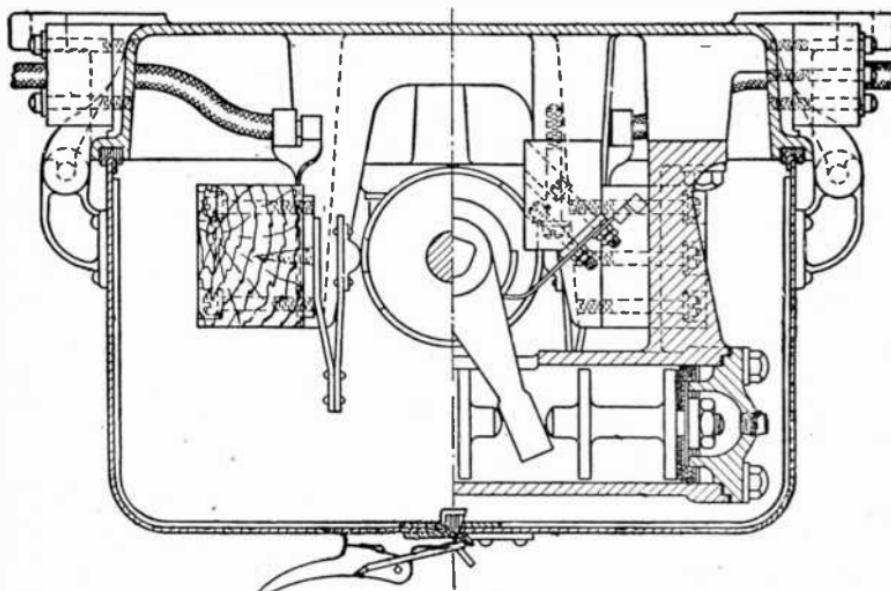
,294.—Westinghouse reverser. *Adjustments:* The portion of the finger which makes contact with the drum should be true so that when pressed against a flat surface it makes contact throughout its entire width. Adjustment of each finger may then be easily made by using a wrench where necessary to bend the finger spring to insure proper alignment. After adjustment spread grease on the drum segment and move the drum back and forth to thoroughly lubricate contact surfaces several times. Each main finger should be adjusted so that it drops from $\frac{1}{16}$ " to $\frac{1}{8}$ " below the surface of the drum segment when it is in the open or "off" position. If the finger drop too far there is danger that the drum segment will jam the finger. If the finger be not adjusted far enough below the surface of the drum segment there will not be sufficient pressure between the contacts to carry the current and overheating and welding of contacts may result.
